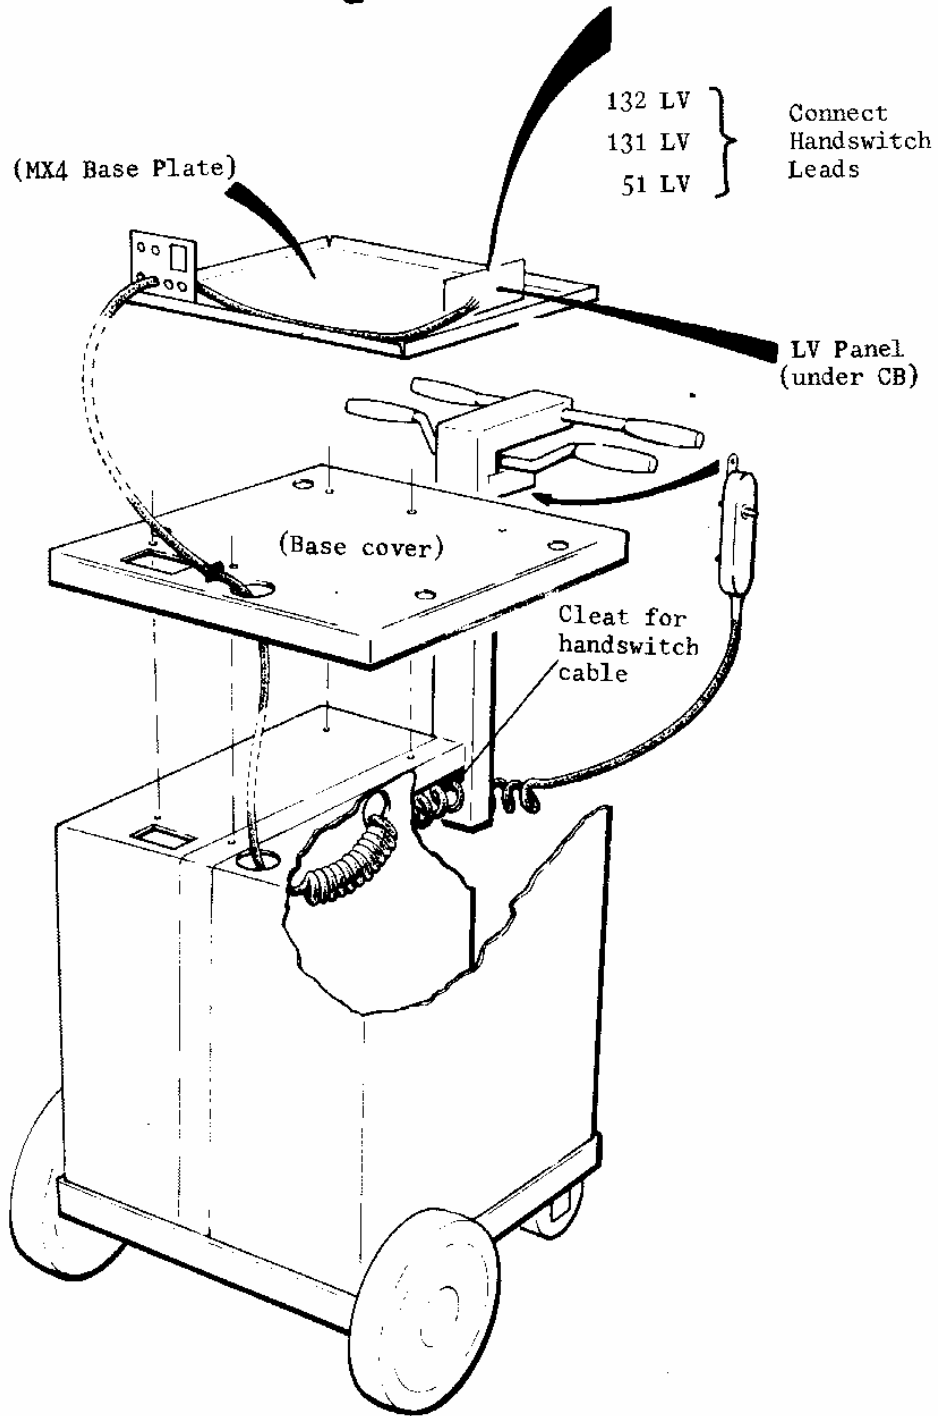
Exploded and Cut-away Views of MX4 Control and Base to
